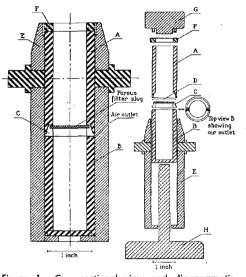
Cross-sectional view and diagrammatic exploded view of centrifugal filtration assembly
